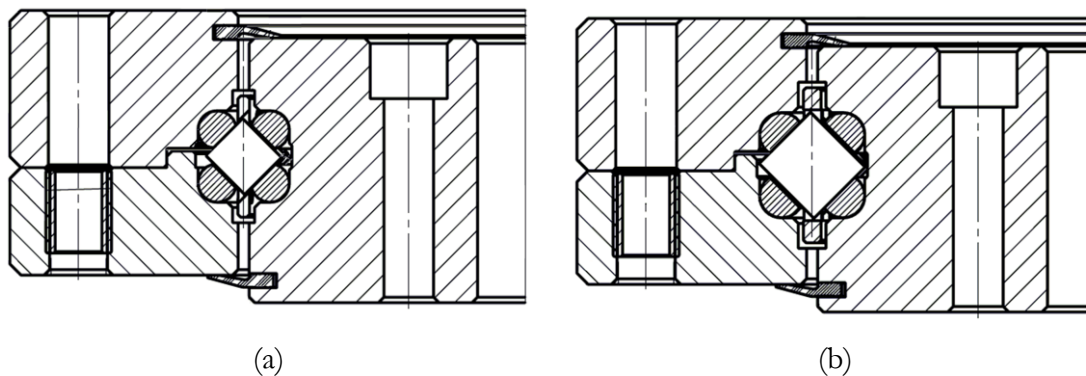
Bearing designs cross-section: (a) Bearings 1-2; (b) Bearings 3-4.
